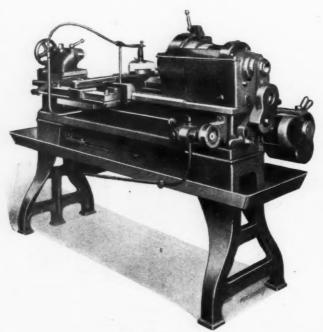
Davis "Close-coupled" Tool-room Lathe
